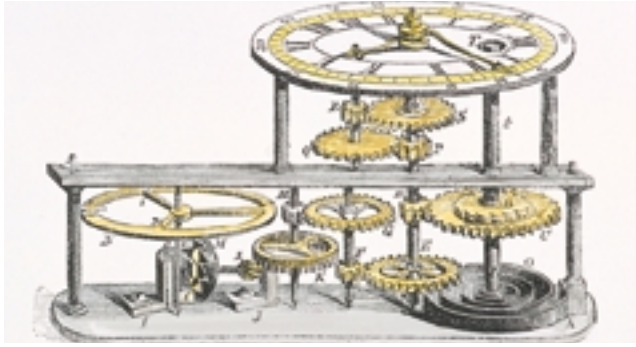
A gear train consists of two or more gears in contact with each other.
